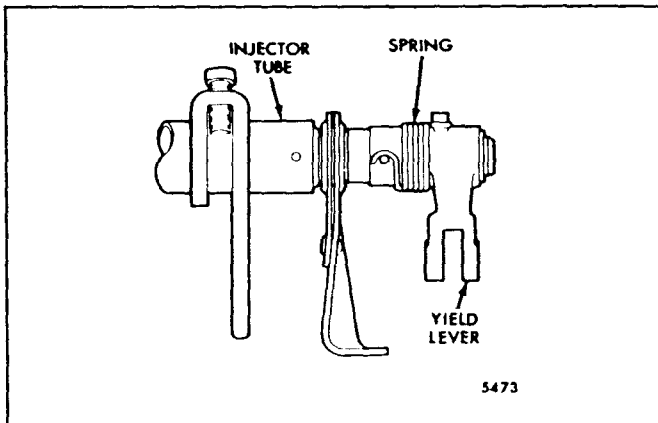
Throttle Delay Yield Lever (In-Line Engine)
